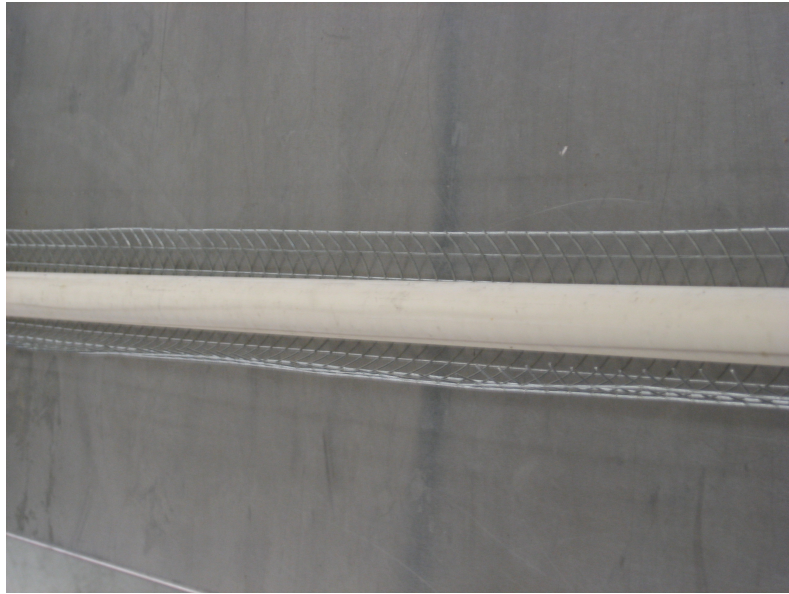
Thermosiphon Manufacturing: Step 3. The PVC pipe inside of the partially formed wire mesh cylinder.
